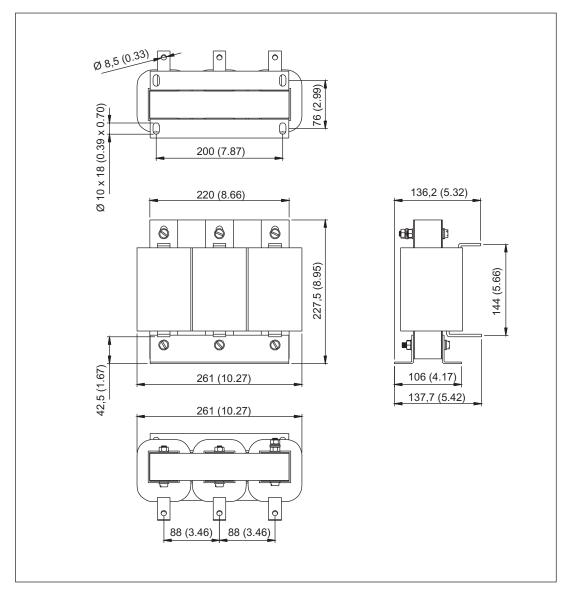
Dimension drawing of line reactor for Basic Line Module 100 kW, all dimensions in mm and (inches)
